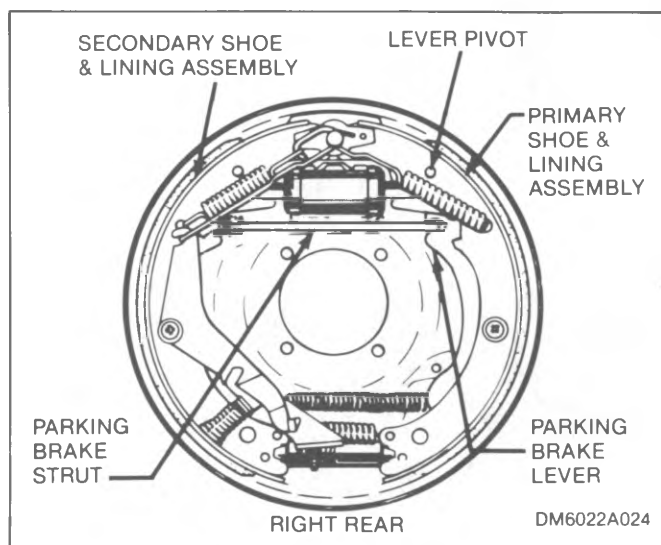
Parking Brake Components With Rear Entry Parking Brake Cable
